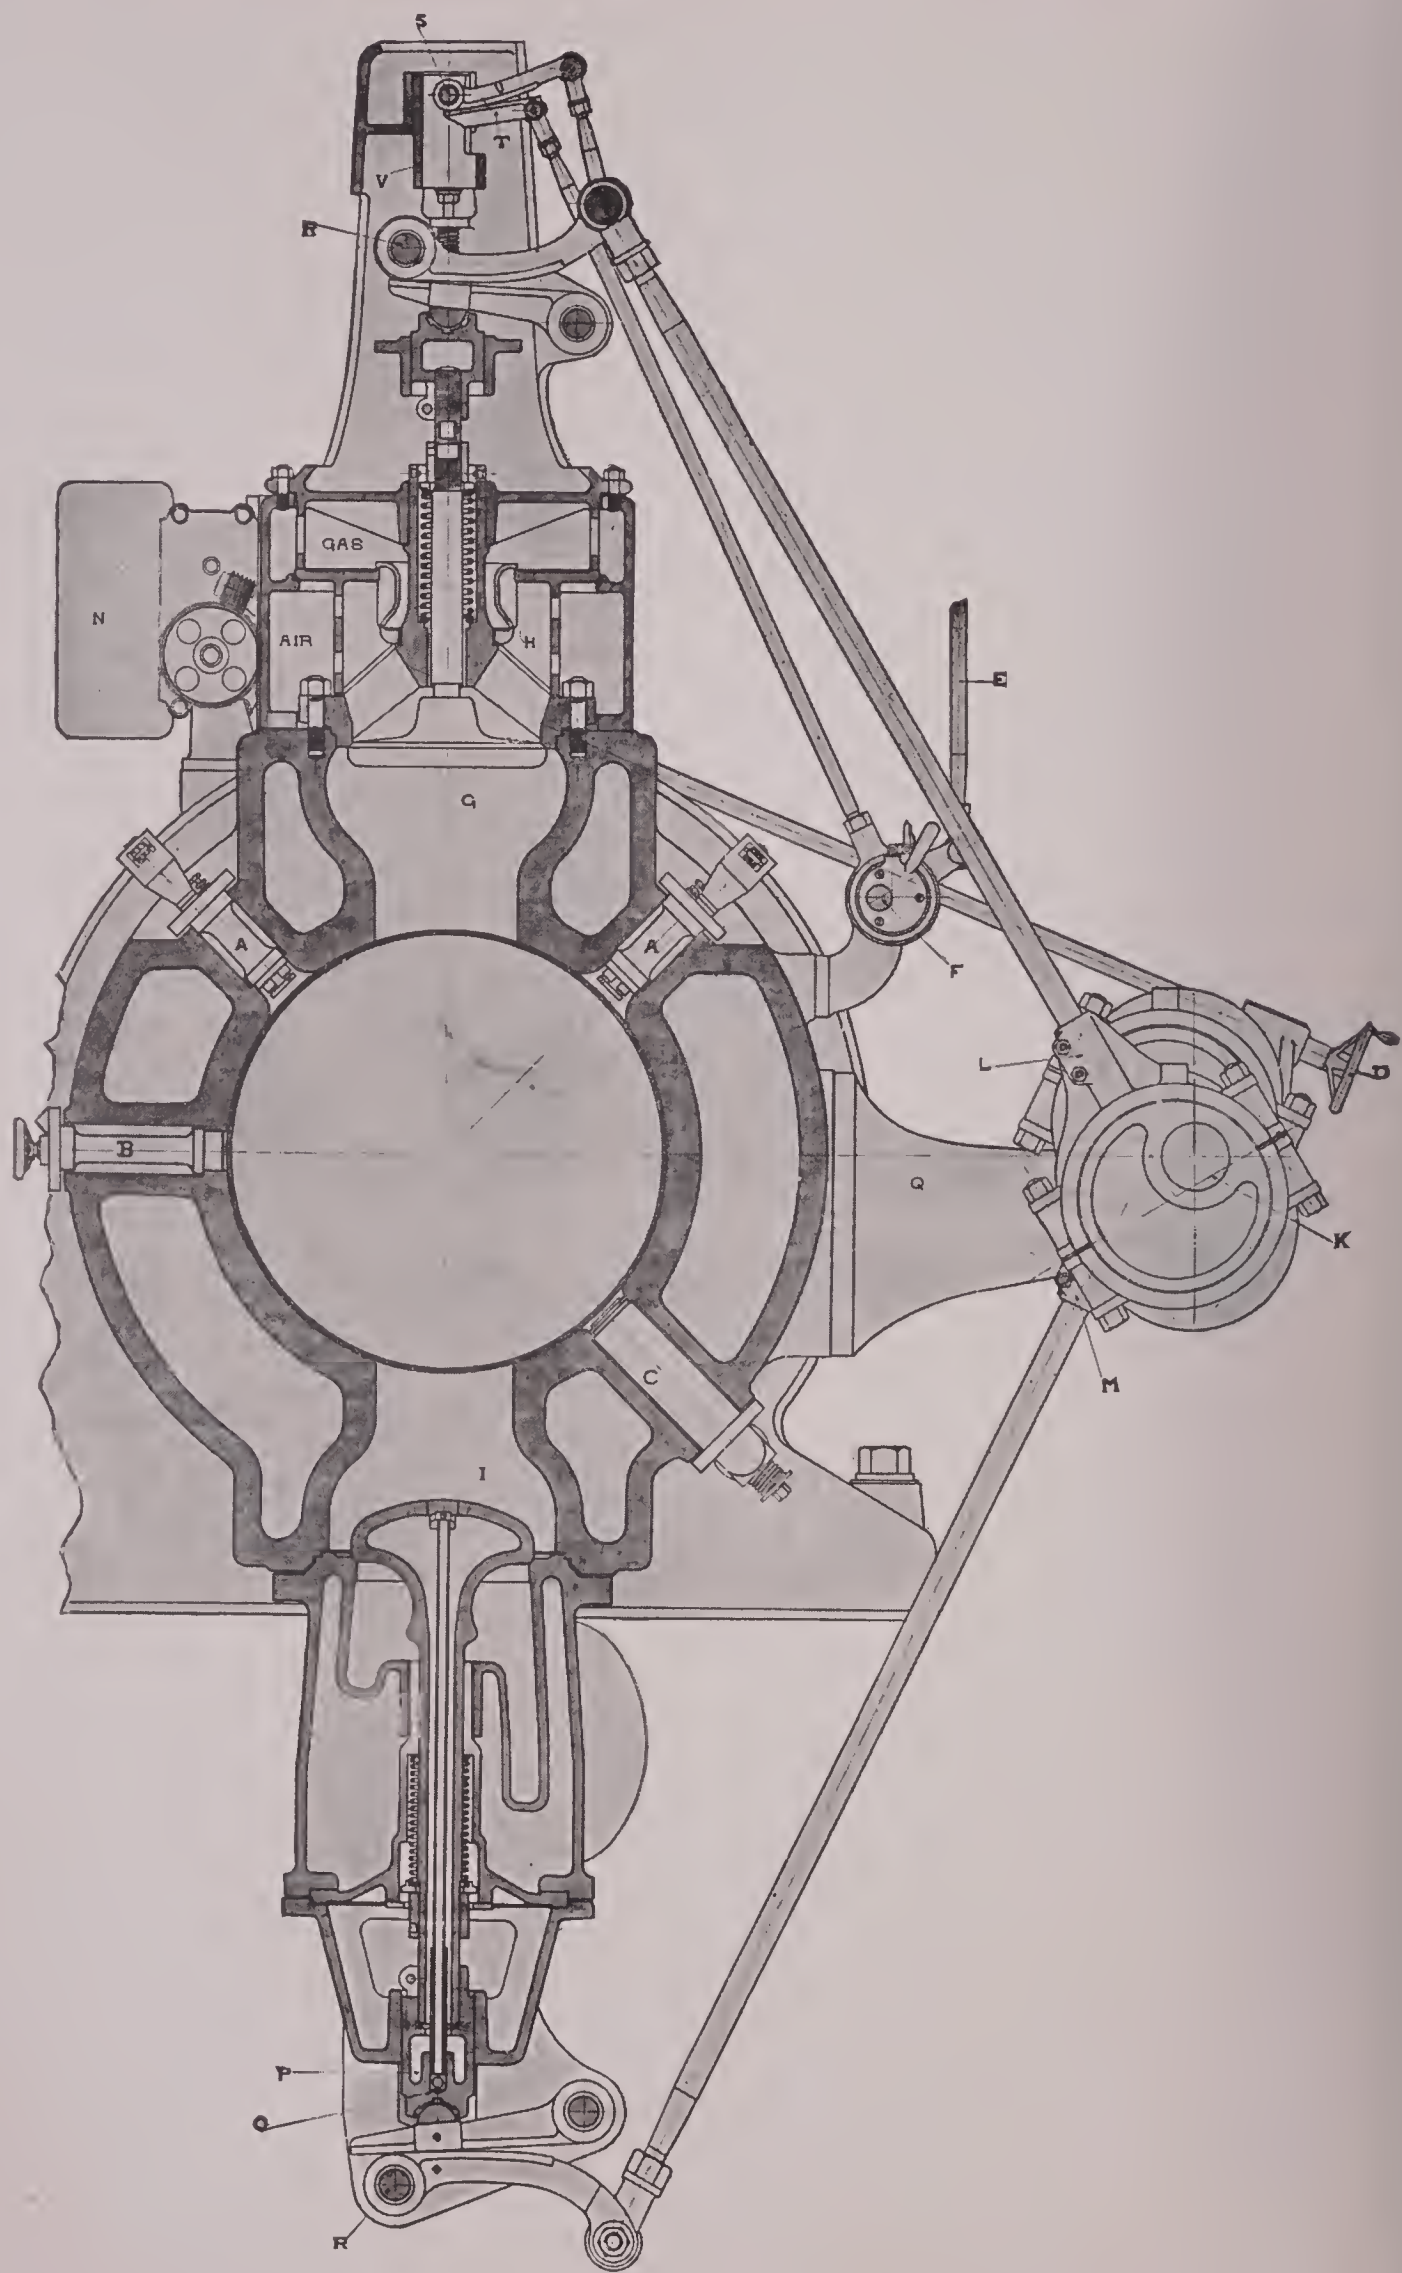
Cross-section of Cylinder and Valves, Allis-Chalmers Engine.
